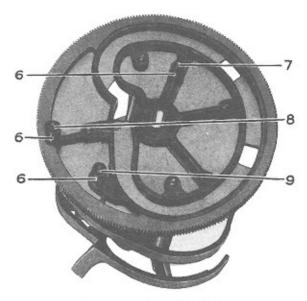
No. 11648-A Turntable Cam and Lift Assembly (Top View)
